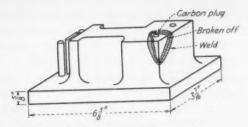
Broken tools and dies can be salvaged often by welding.
